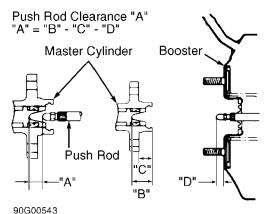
Adjusting Push Rod Clearance Courtesy of Mitsubishi Motor Sales of America.
